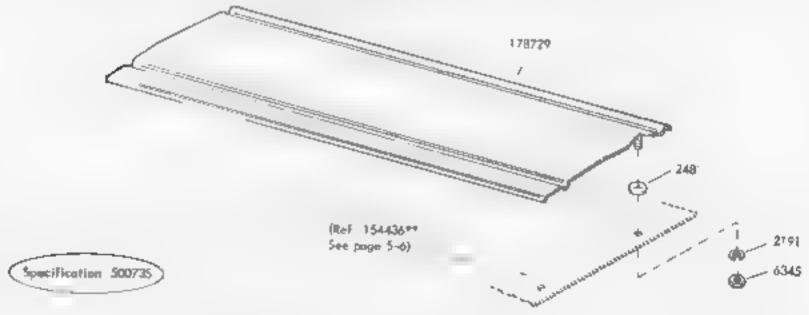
174458 MODIFICATION KIT TO PROVIDE CABINET WITH A PAPER TEARING PLATE
